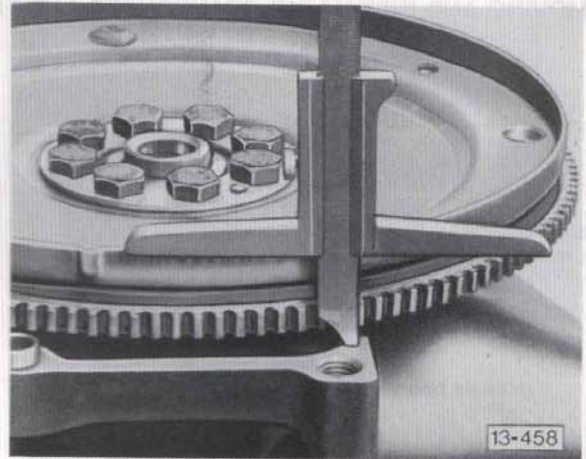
Installing torque converter drive plate: first measure distance from drive plate to engine block
